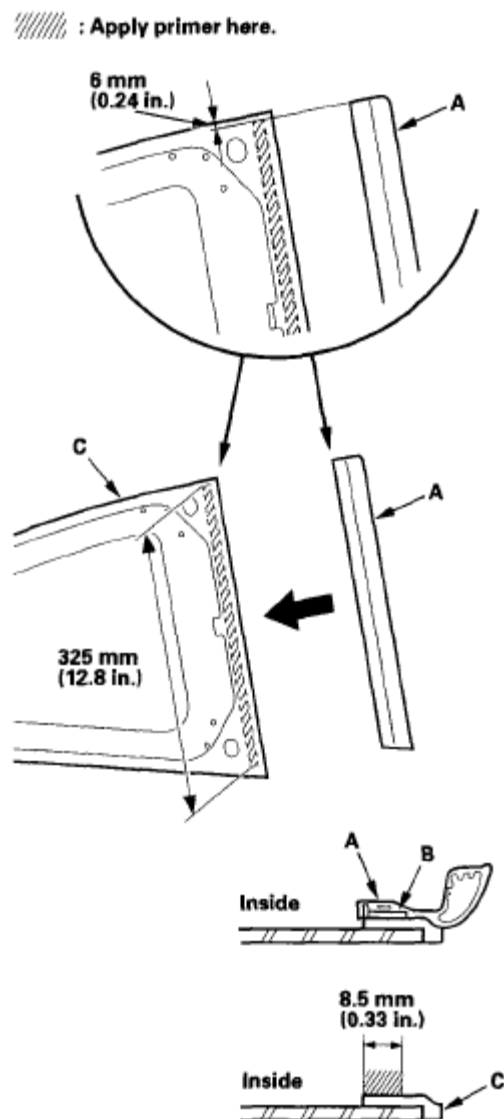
Attaching Front Seal With Adhesive Tape Onto Molding (With Specifications)
